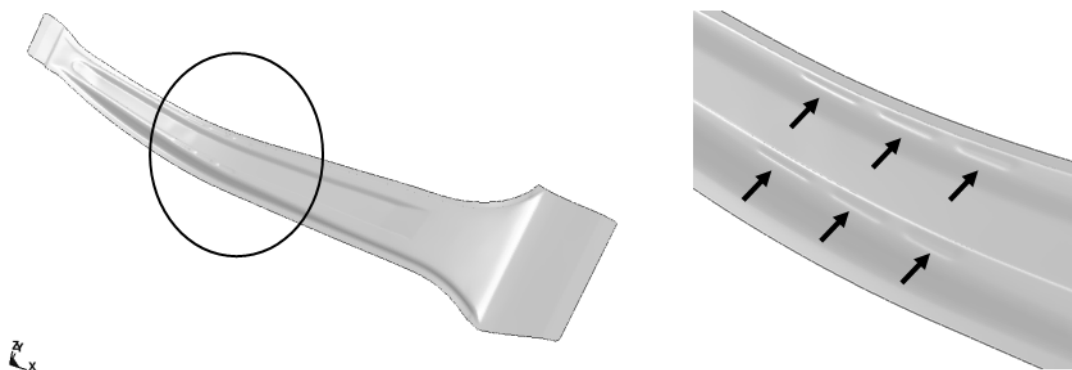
Six beads added to initial shape to reduce springback suggested by springback-root-cause analysis
